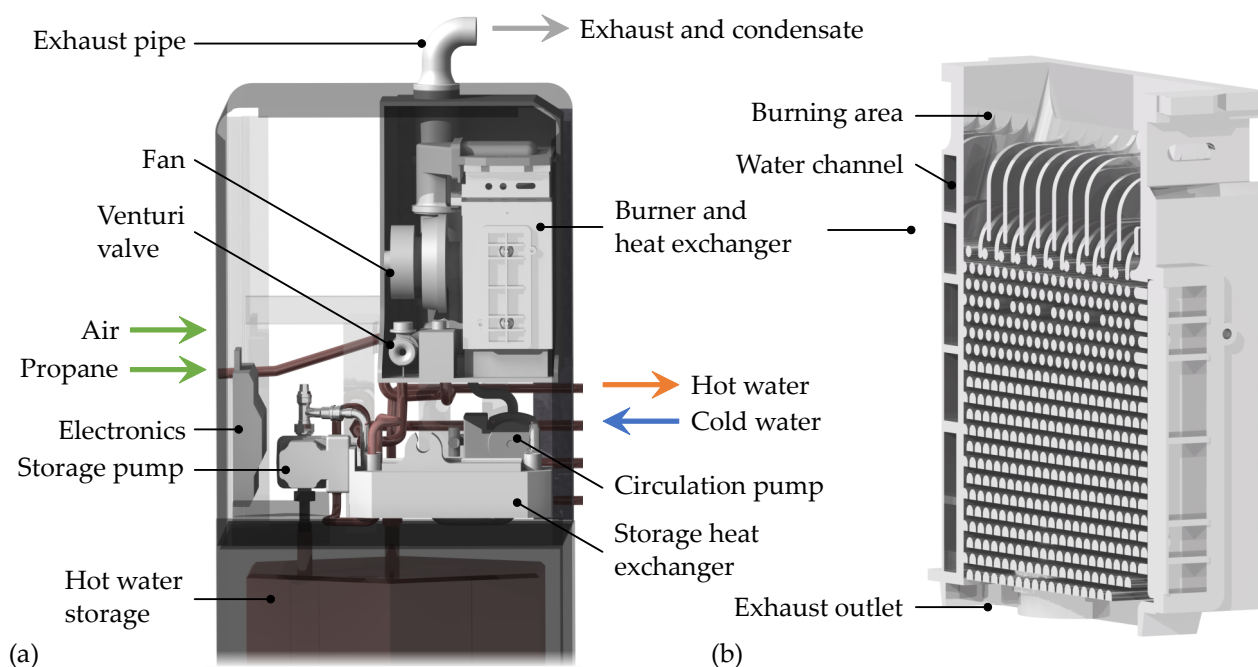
(a) Composition of the condensing boiler and its interfaces; (b) Detailed sectional view of the integrated burner and heat exchanger of the system.
